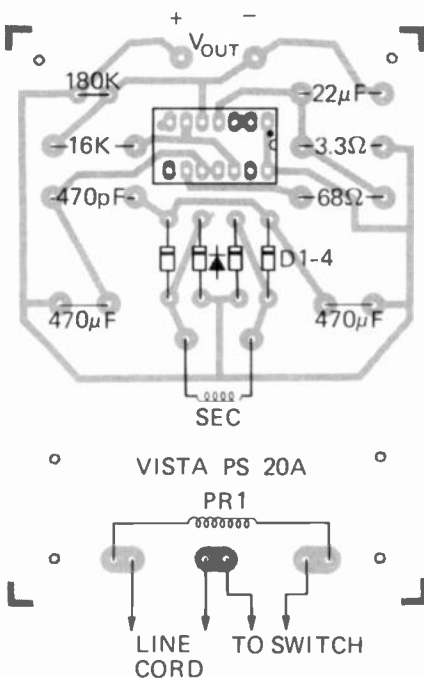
COMPONENT PLACEMENT of power supply printed circuit board.
